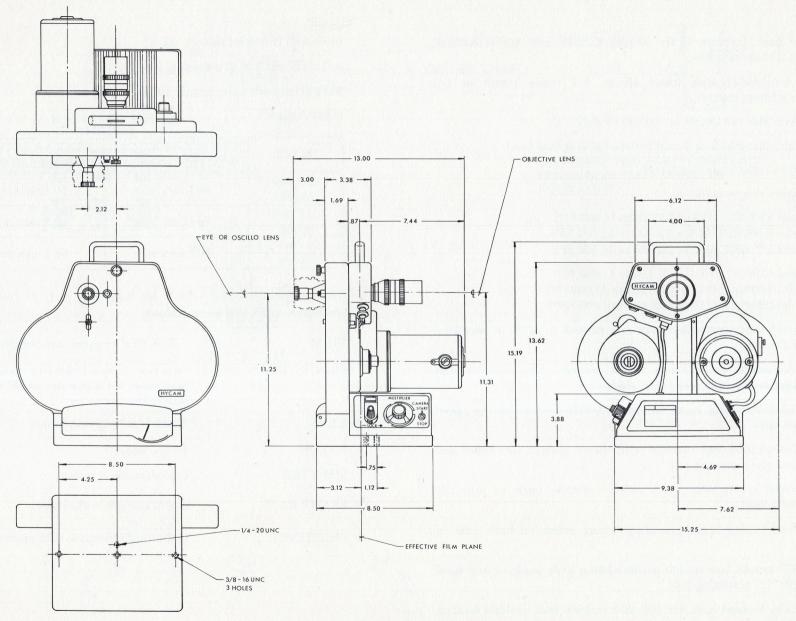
400' HYCAM OUTLINE DRAWING
